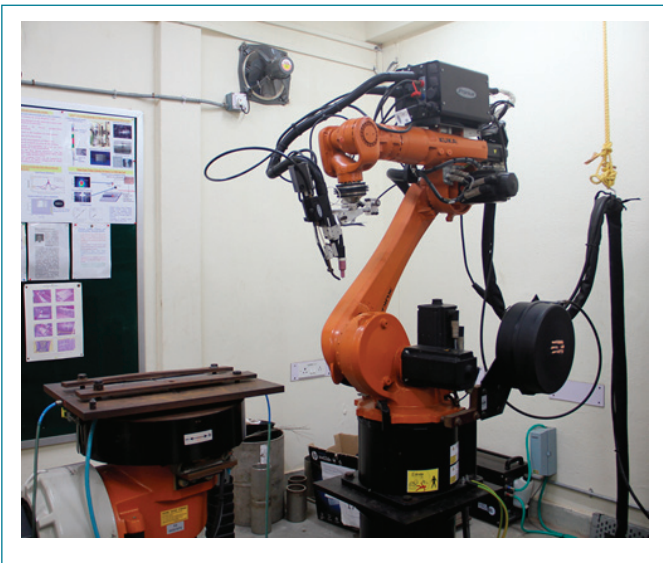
Robotic hot wire TIG welding machine at MJS
